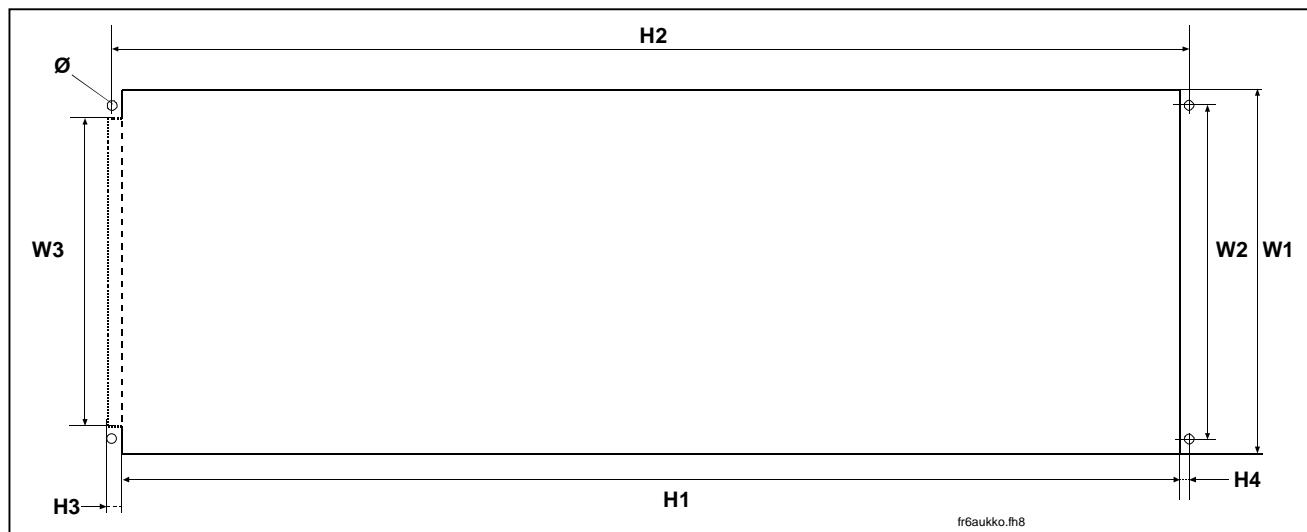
The opening needed for the flange mounting, FR4 to FR6
